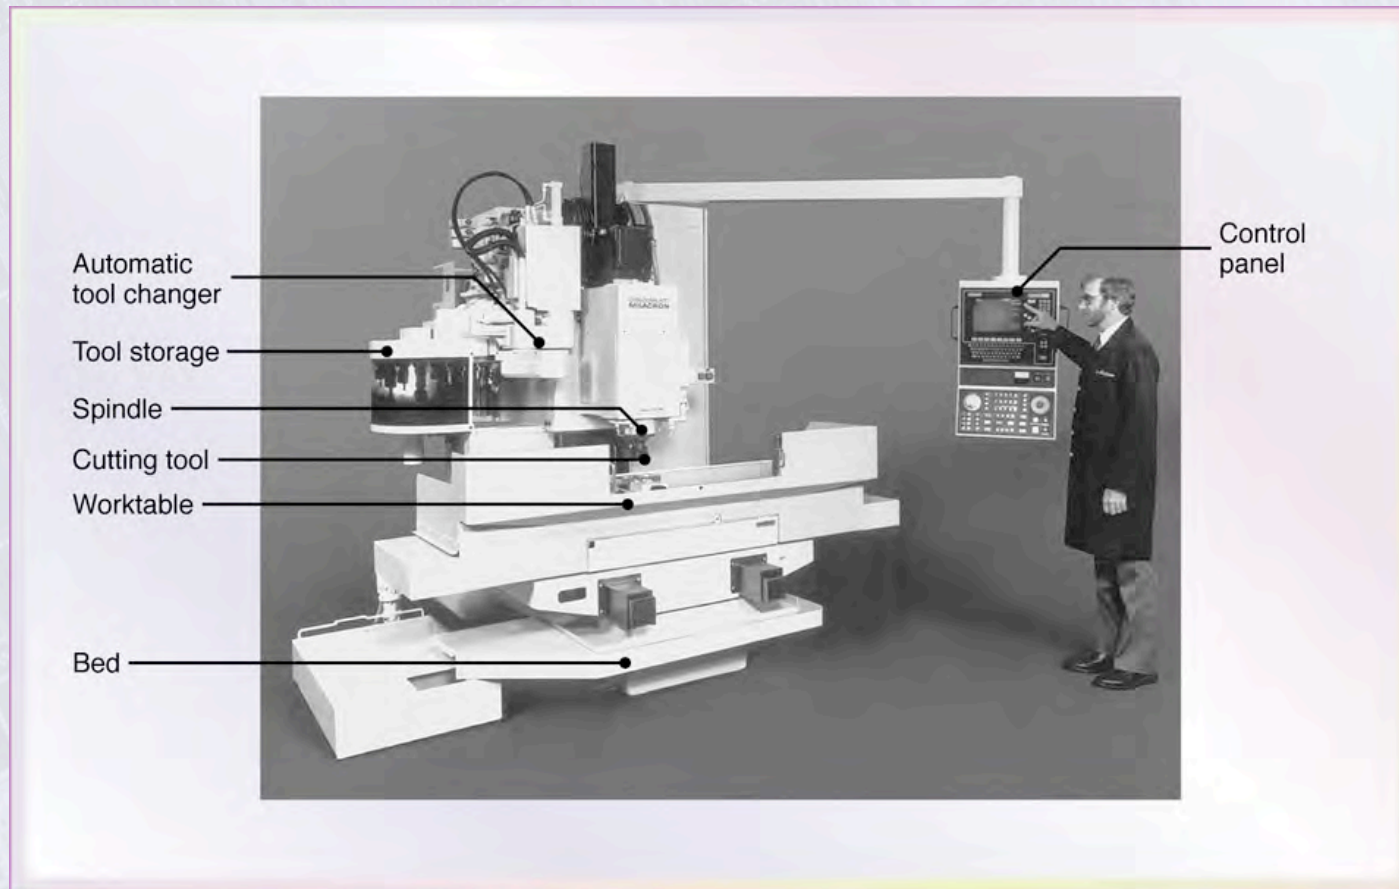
A vertical-spindle machining center. The tool magazine is on the left of the machine. The control panel on the right can be swiveled by the operator. *Source:* Courtesy of Cincinnati Milacron, Inc.
